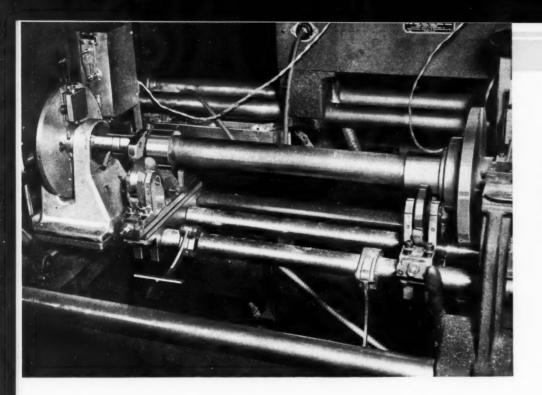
Another Master which is Employed for Lining up the Rollers that Support the Crankshaft in Line with the Headstock and Tailstock Counterweights
